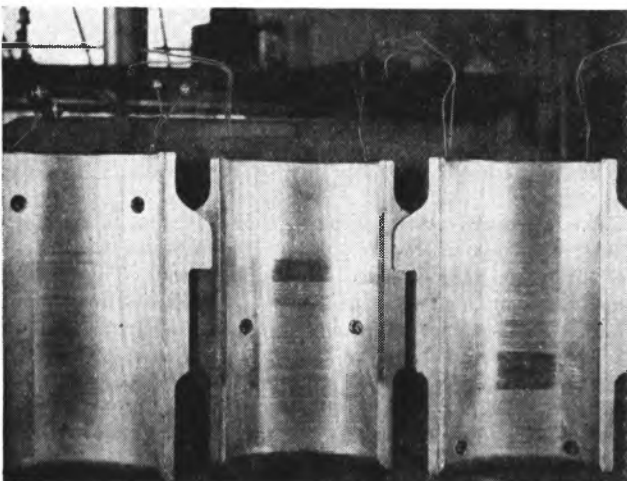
LOCATION OF THERMOCOUPLES IN BEARING SURFACE
